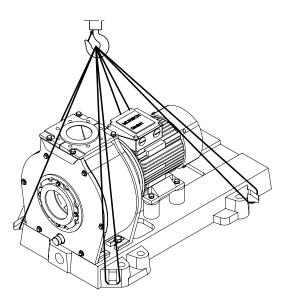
Fastening the lifting gear to the pump unit with base plate
